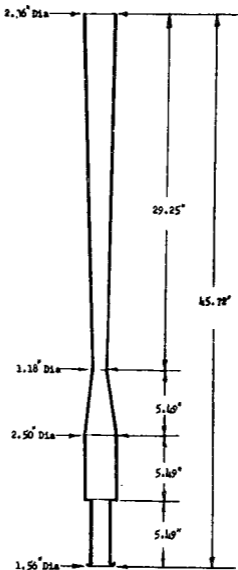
SKETCH SHOWING DIMENSIONS OF HS-1(.075) COMBUSTOR
